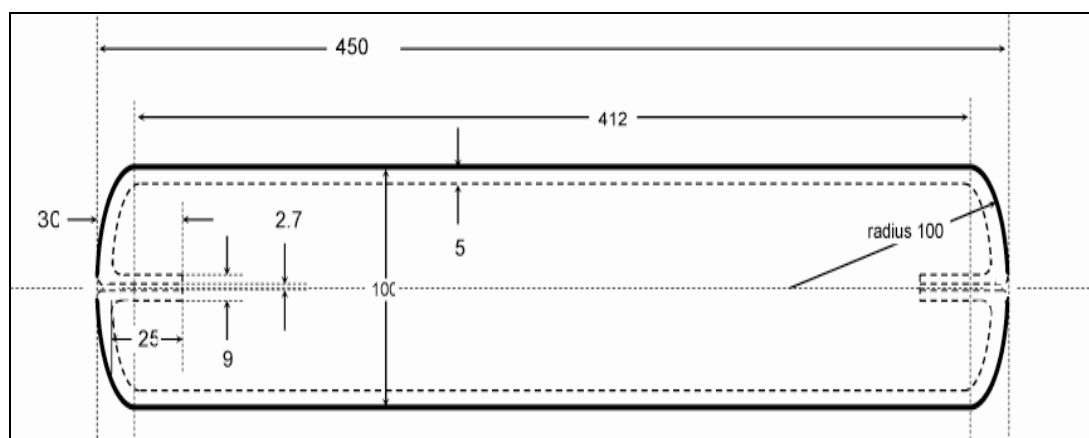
Glass cylinder of TRAC collector. Vessel made of borosilicate glass is wrapped in a heat shrinkable tubing. Each cylinder has two open points, inlet and outlet, where the stainless steel tubing is connected to. All linear dimensions are given in (mm).
